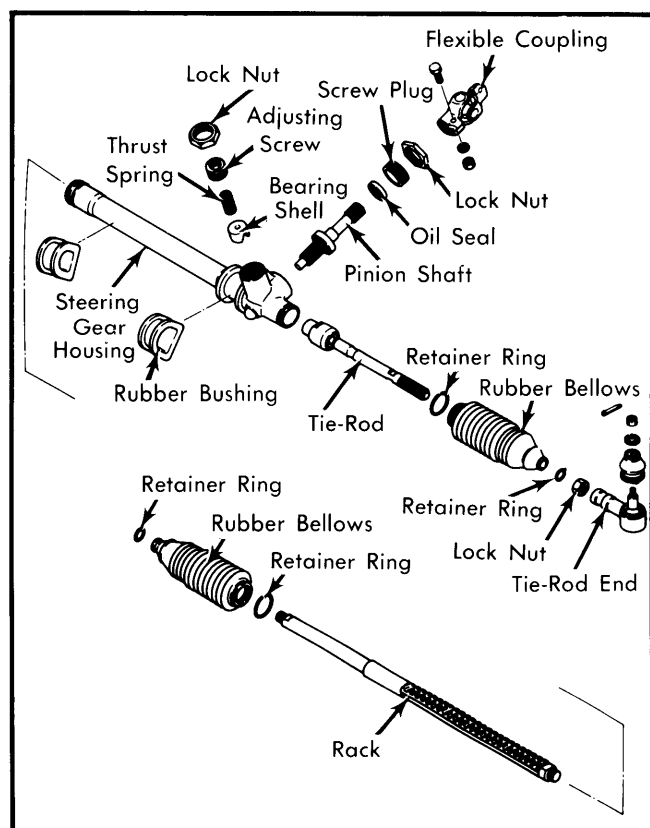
Exploded View Showing Various Components of Rack & Pinion Steering Gear Assembly
